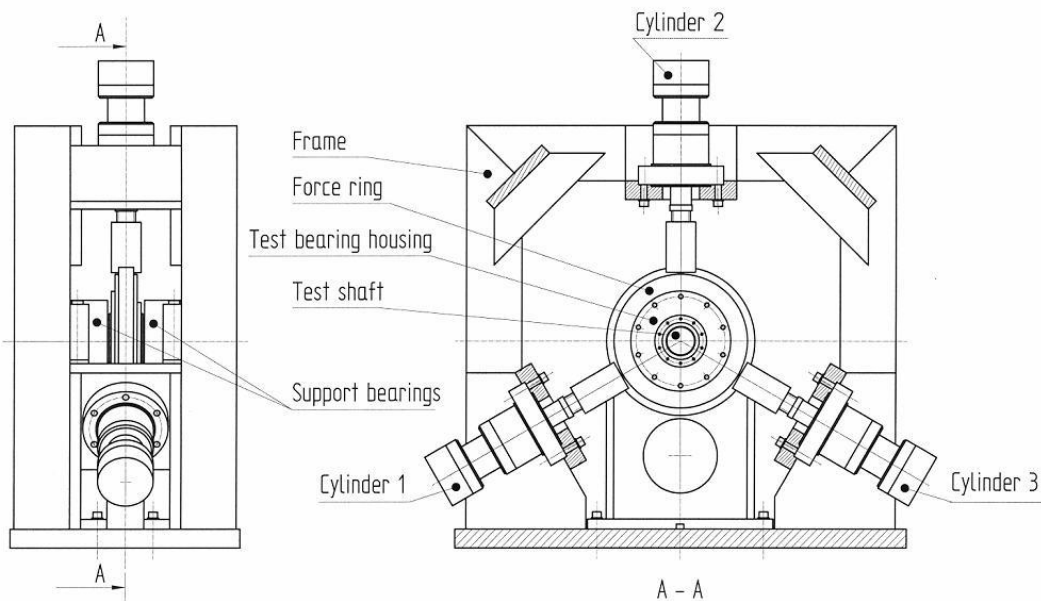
Versatile bearing test rig with hydraulic cylinders generating the bearing load.
